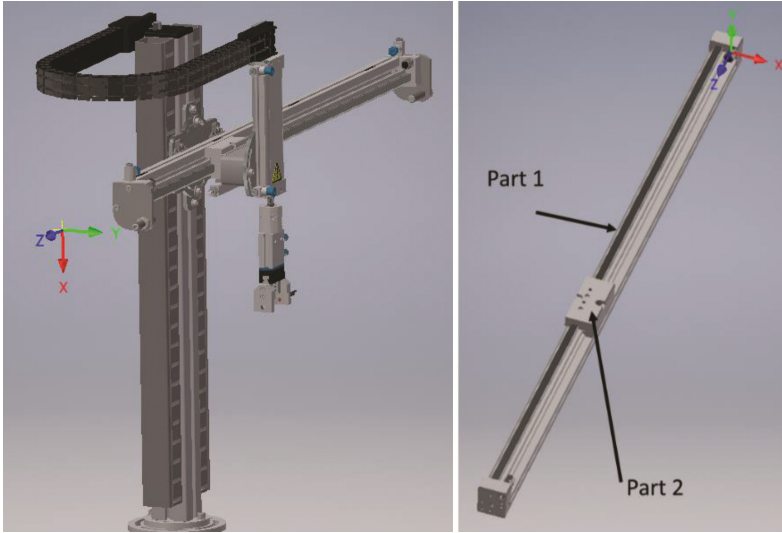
3D-CAD complete assembly (left) and linear actor assembly (right)
